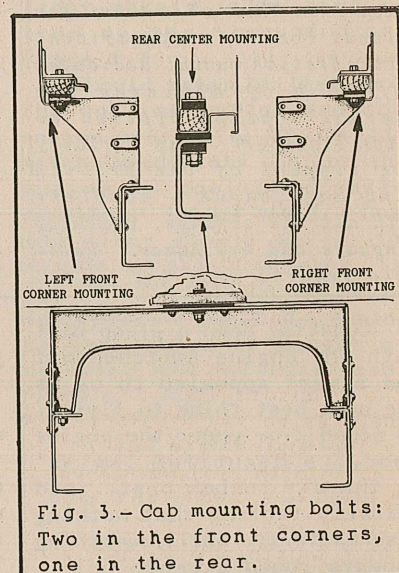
Cab mounting bolts: Two in the front corners, one in the rear.
